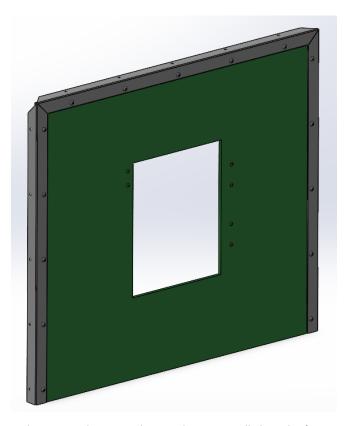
Aluminum side trim and top wide trim installed on the front acrylic.
